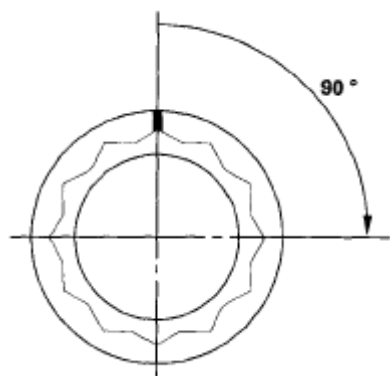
Identifying Connecting Rod Bolt Tightening Angle
